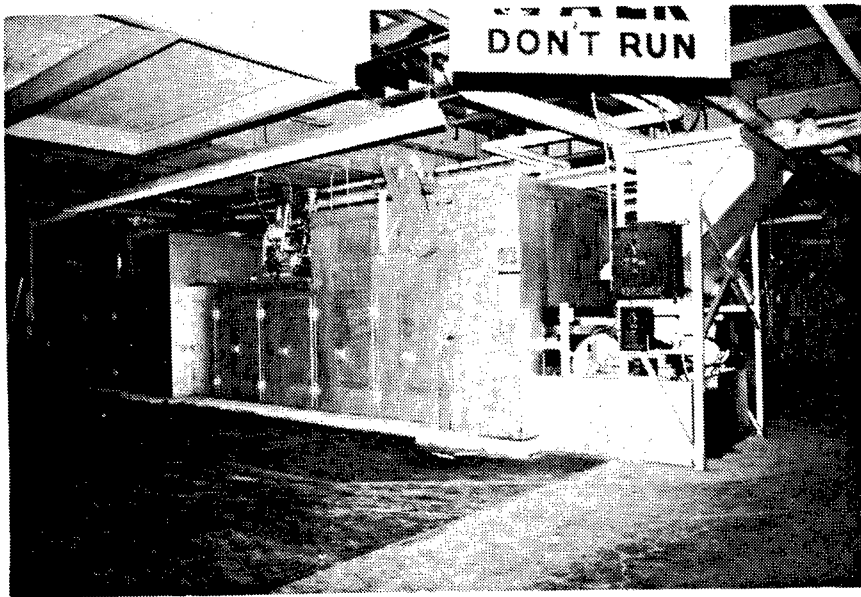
Building 102: Salem Furnace manufactured by Salem Engineering.
